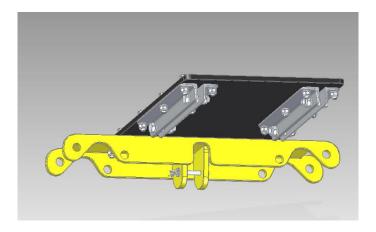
Top plate with mounted steel angle bracket joints and UNP-beam with mounting plates.
